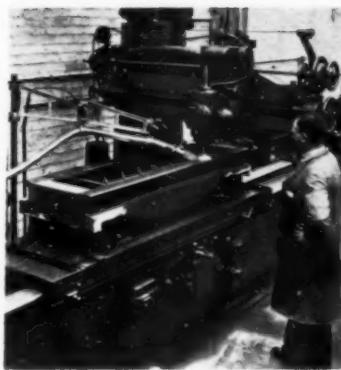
A Churchill slideway grinding machine for grinding machine-tool ways and slides.
